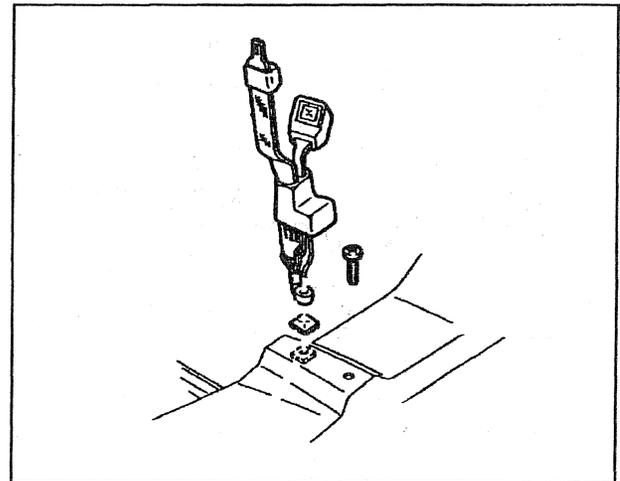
Front Seat Belt Attachments (Regular Cab with Bucket Seats)
